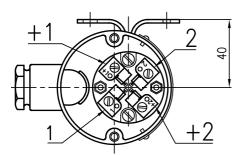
DIMENSIONAL DRAWING - DESIGN G WITH HEAD OF TYPE B PURSUANT TO DIN 43 729 (only as a special request on the basis of an agreement with the manufacturer)
